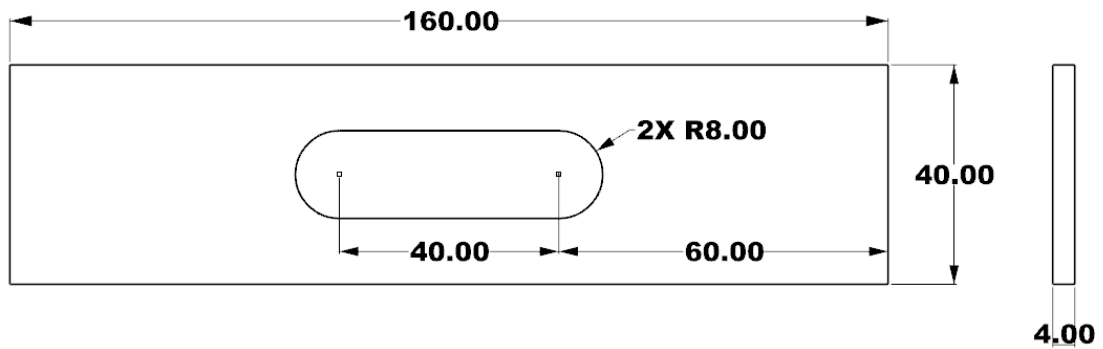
Details of the rectangle with slot specimen (All dimensions are in mm)
